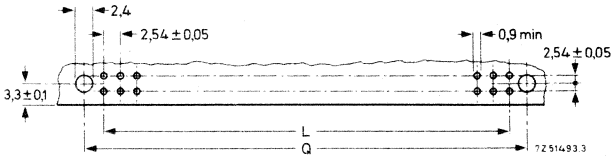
Hole pattern for board mounting of female parts; see Table 4 for dimensions L and Q.
